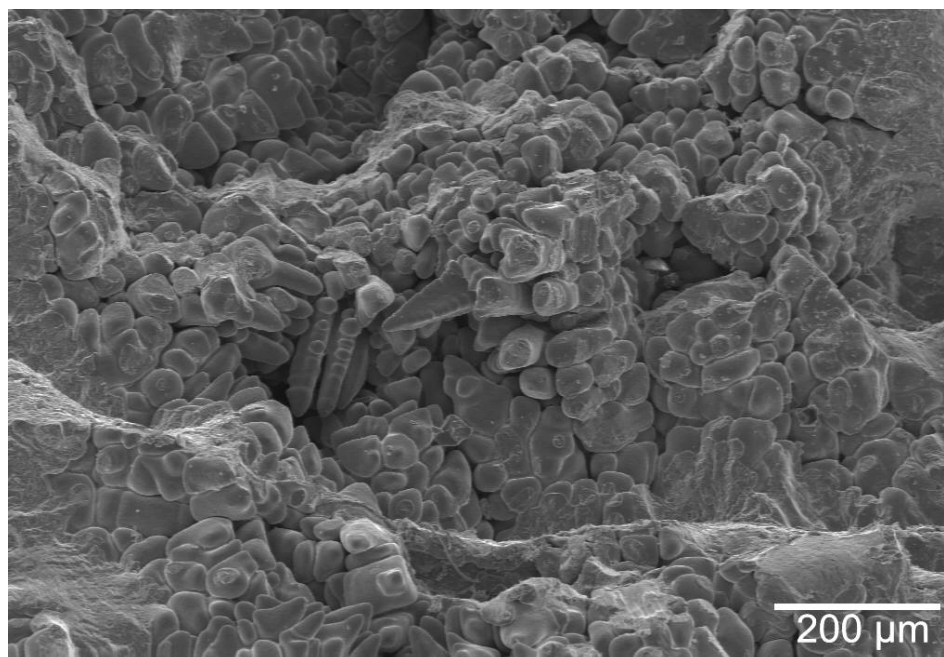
Dendrite Formation on Straight Cylinder Specimen Fracture Surface, $S_a = 588$ MPa (Specimen G5)
